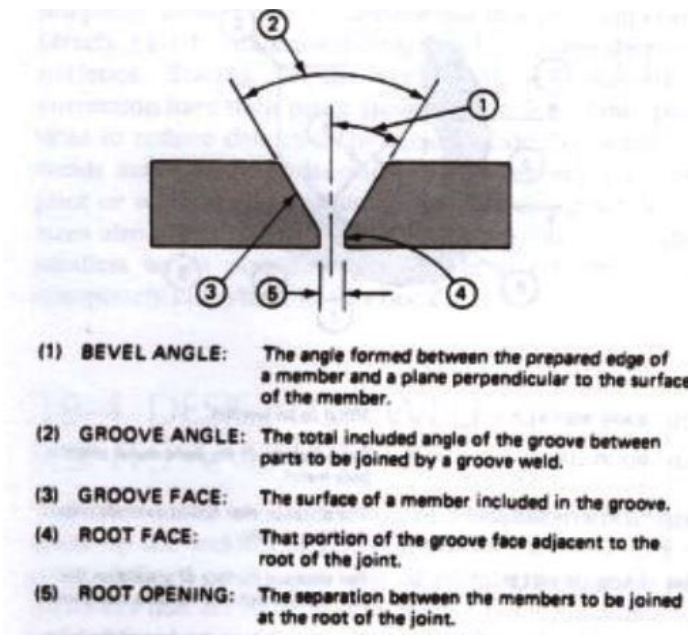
Groove weld (Cary & Helzer2005, 496)
